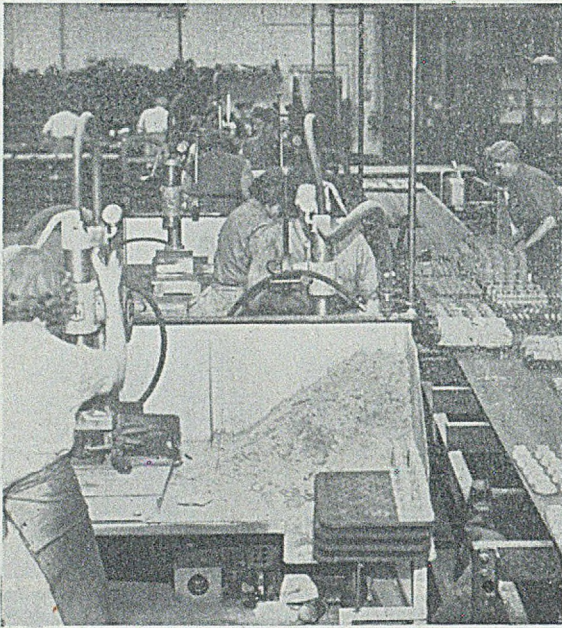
Group of Bench-type Core-blowing Machines alongside the Core Conveyor.
